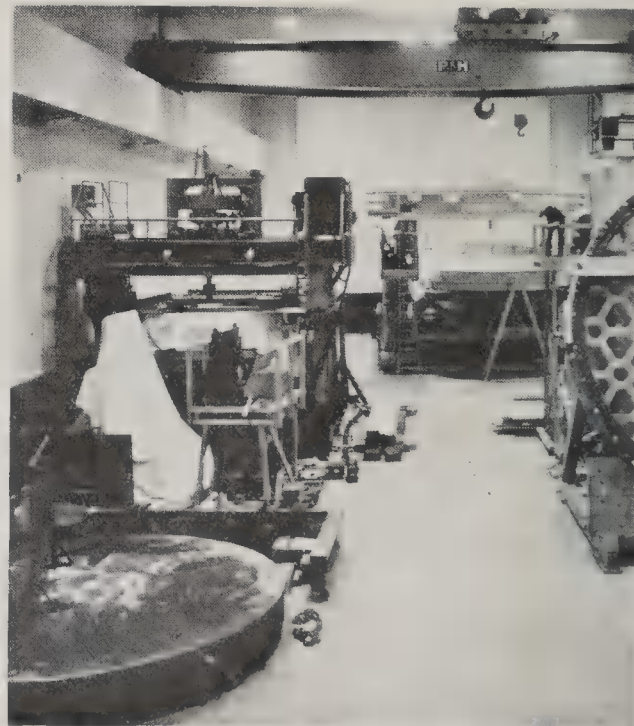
Five-ton, full-sized steel tool. Grinding and polishing machine in rear
